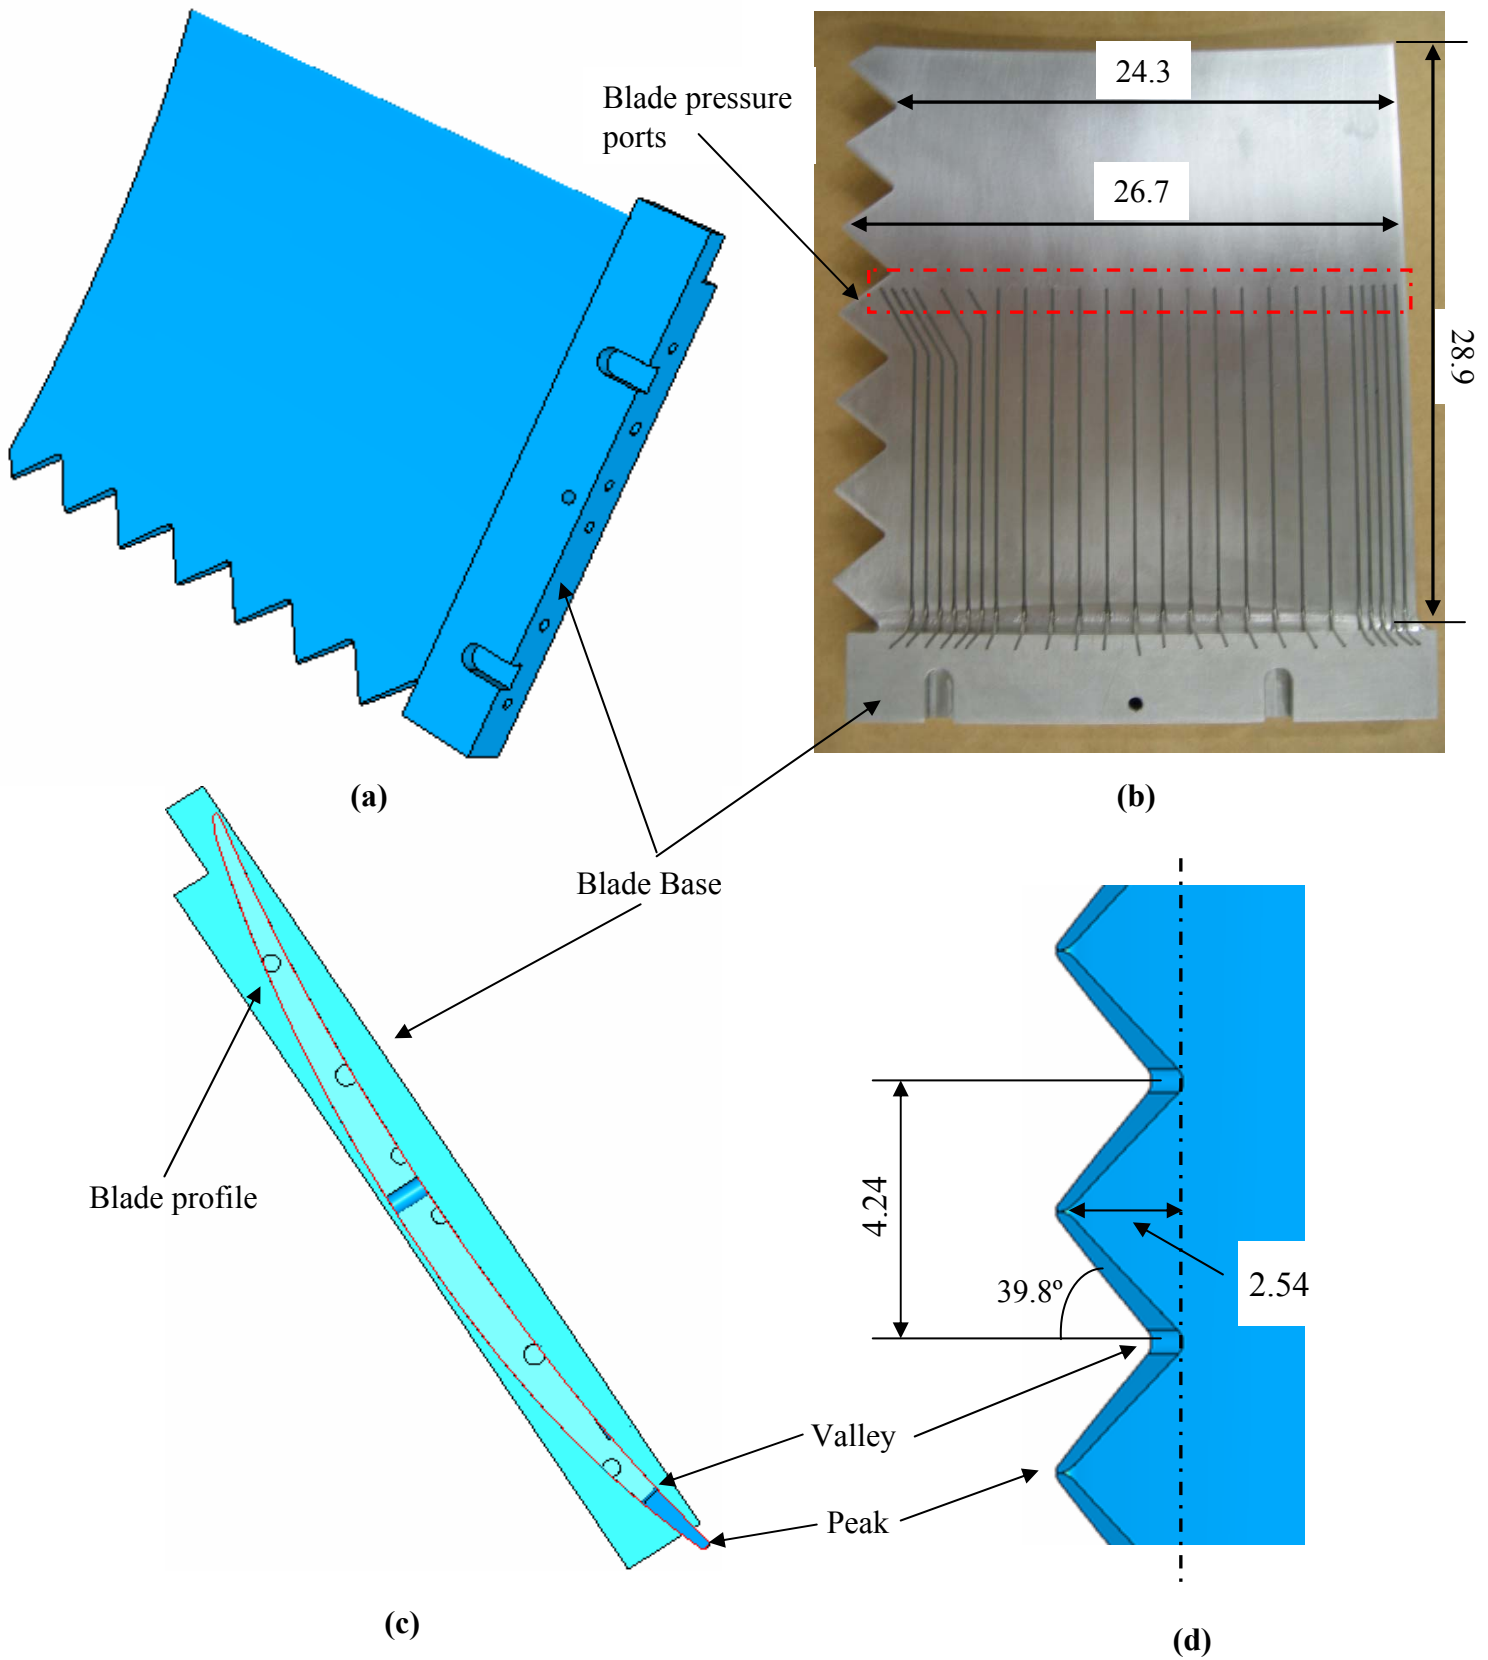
Geometric views of the 2.54 cm serrated trailing edge blade: (a) Isometric view (model) (b) plan view (actual), (c) tip view (model), (d) close-up of serrations (model) (all dimensions in cm).
